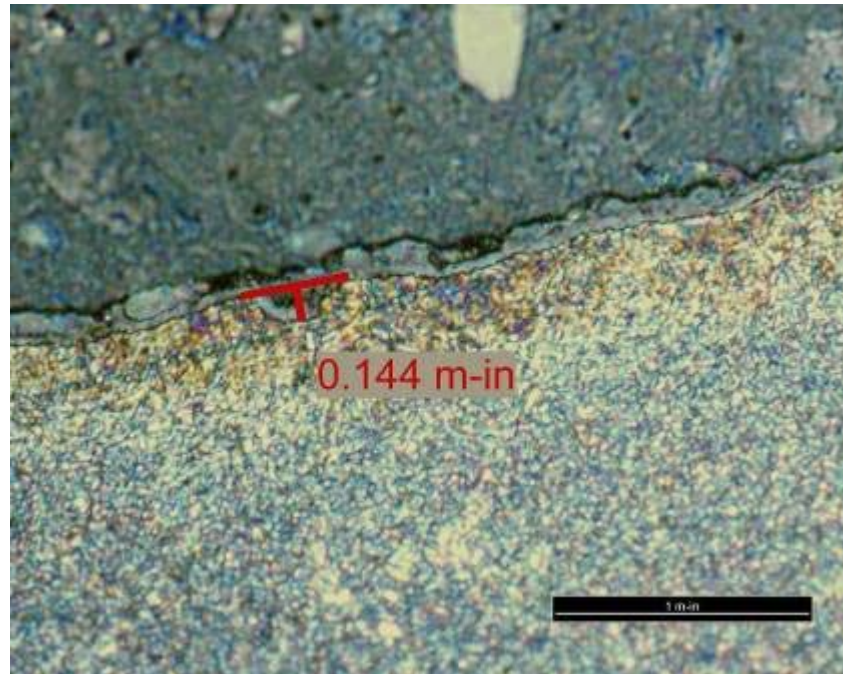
Typical tool mark depth, tooth root, measurement no. 1.
